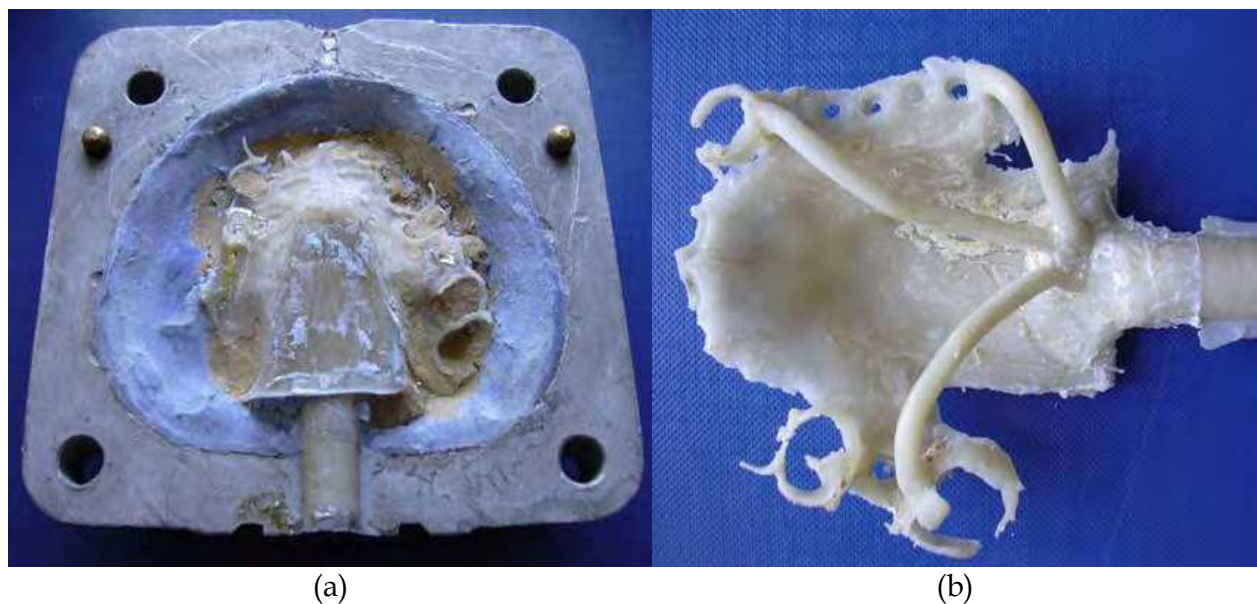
Disassembling the framework of the acetal resin removable partial denture. (a) The framework is still in the flask, (b) Disassembling is complete
